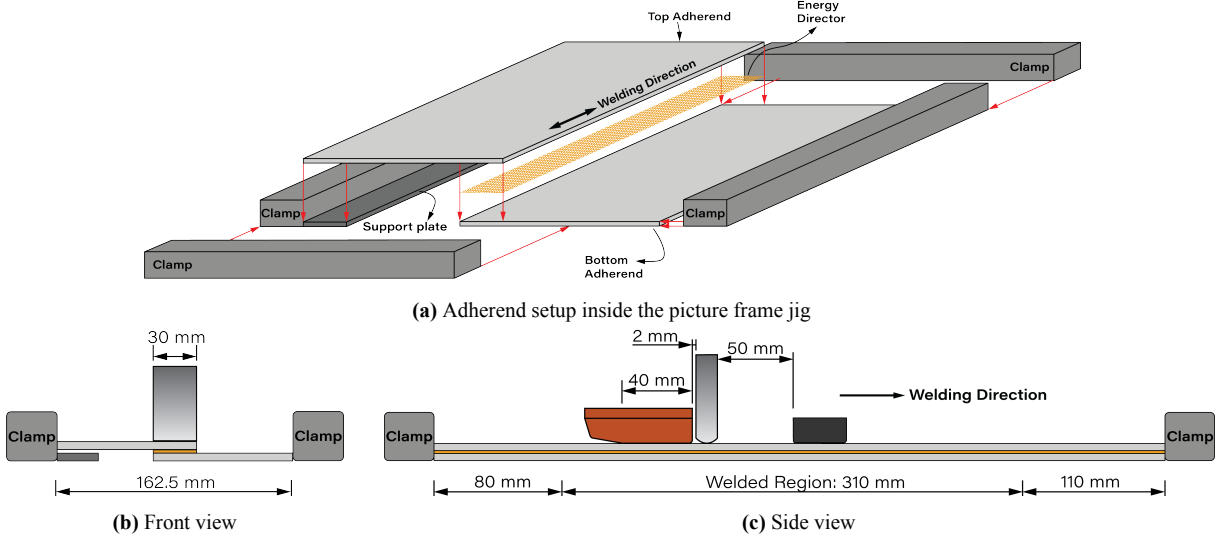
Illustration of the adherend setup inside the picture frame jig used for all the welding experiments
